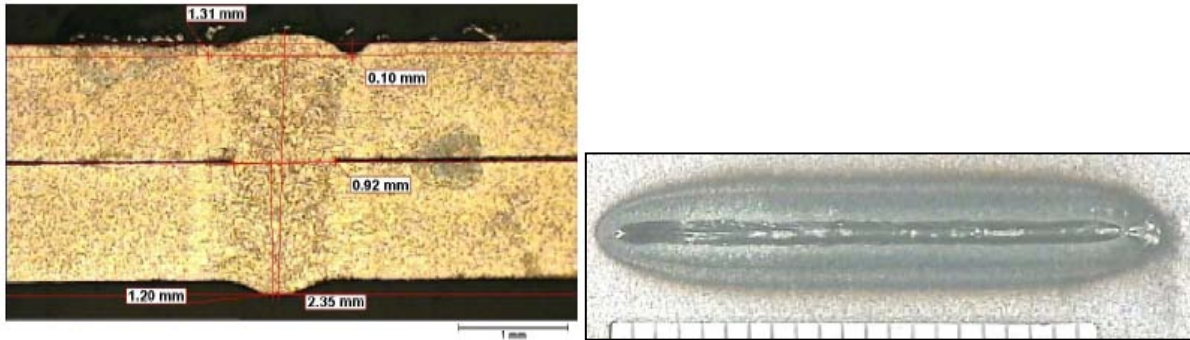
Microsection and top bead: overlap weld:1.2mm to 1.2mm DC05, 0mm gap.
